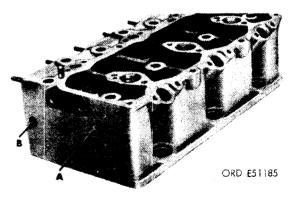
REMOVING OR INSTALLING PIPE PLUG AT FRONT END OF FRONT CYLINDER HEAD.
